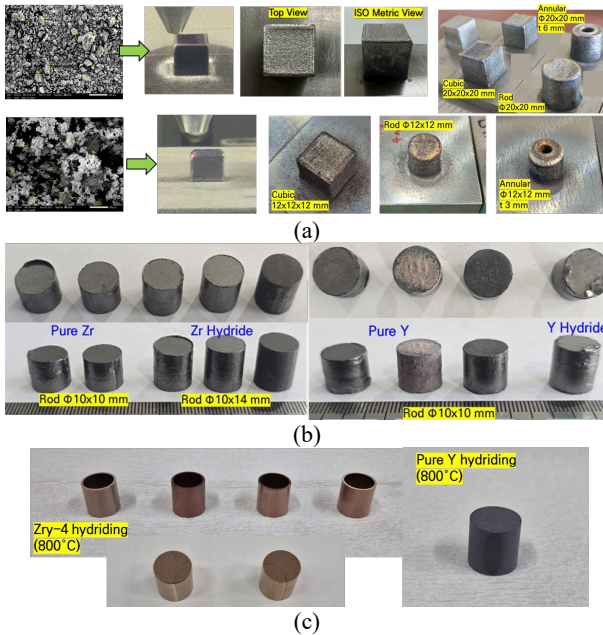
Hydride fabrication by various methods (a) additive manufacturing, (b) powder metallurgy (spark plasma sintering) and (c) direct gaseous hydriding [3]
